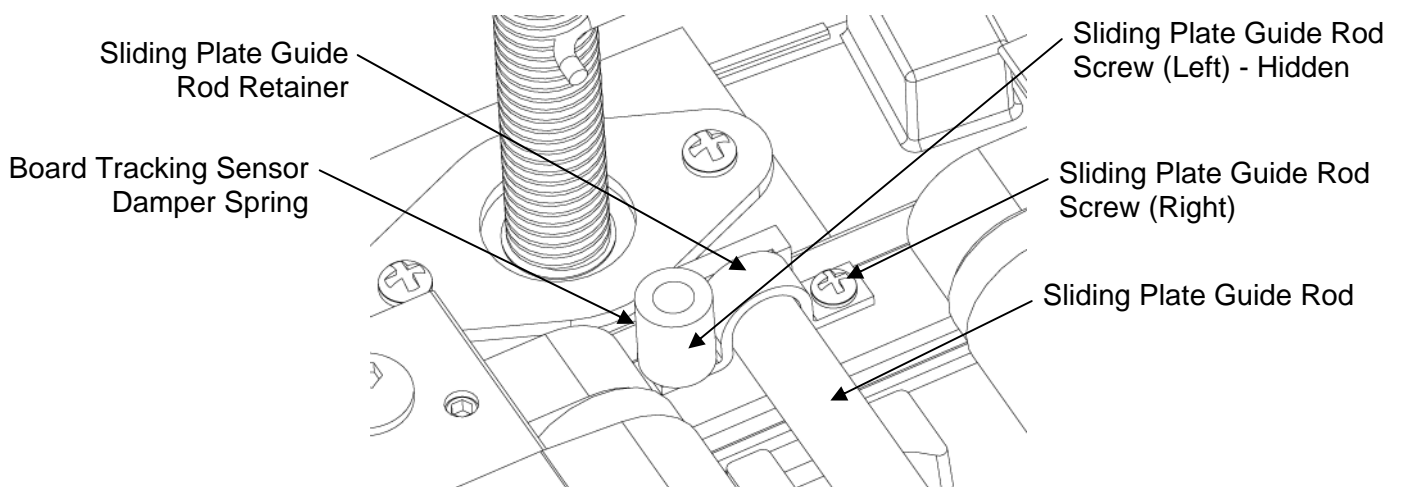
BOARD TRACKING SENSOR DAMPER SPRING PLACEMENT
